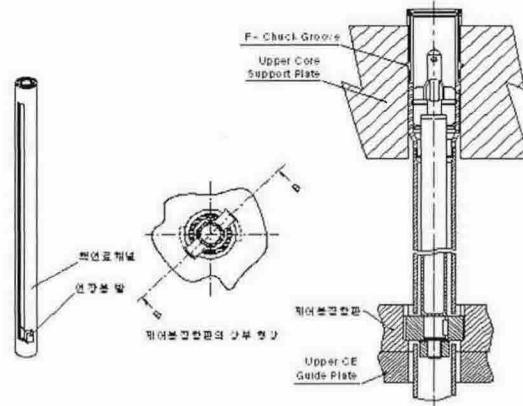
Extension Shaft Assembly Locked by Bayonet
